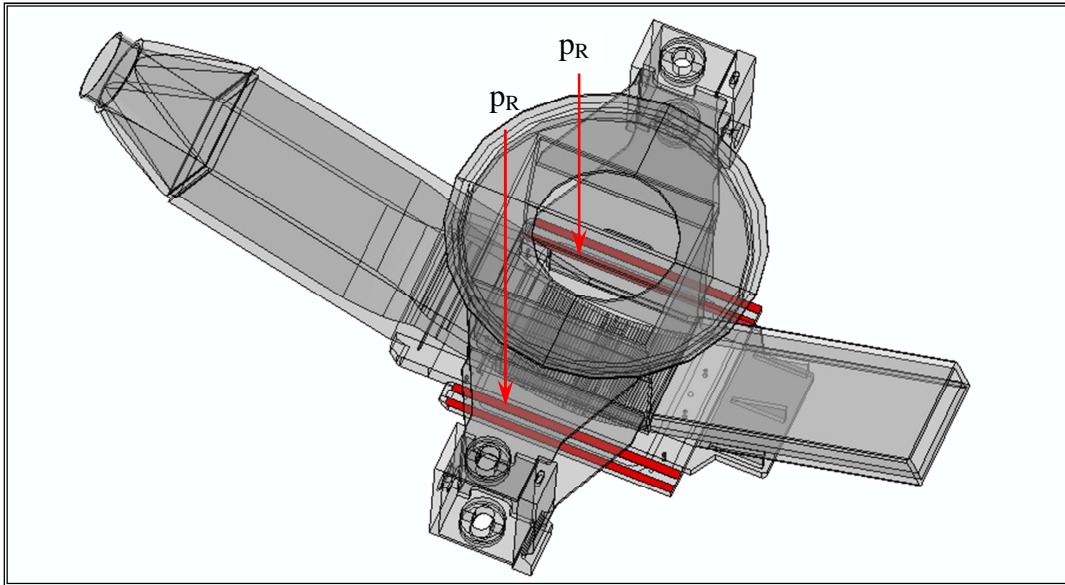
Pressure p_R along frame surfaces in contact with skate external rollers.
